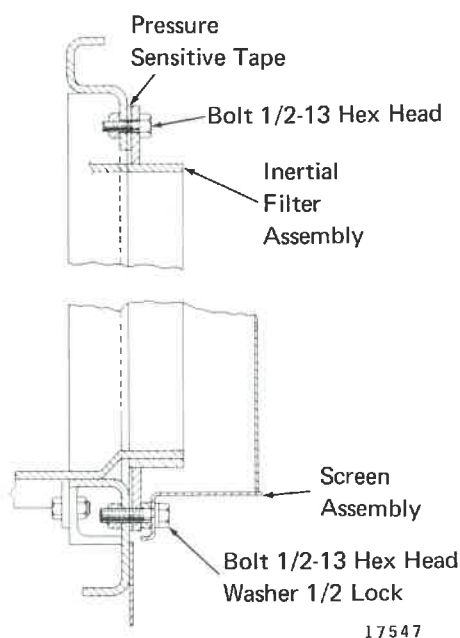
Inertial Filter And Filter Screen Attachment Cross Sectional View
